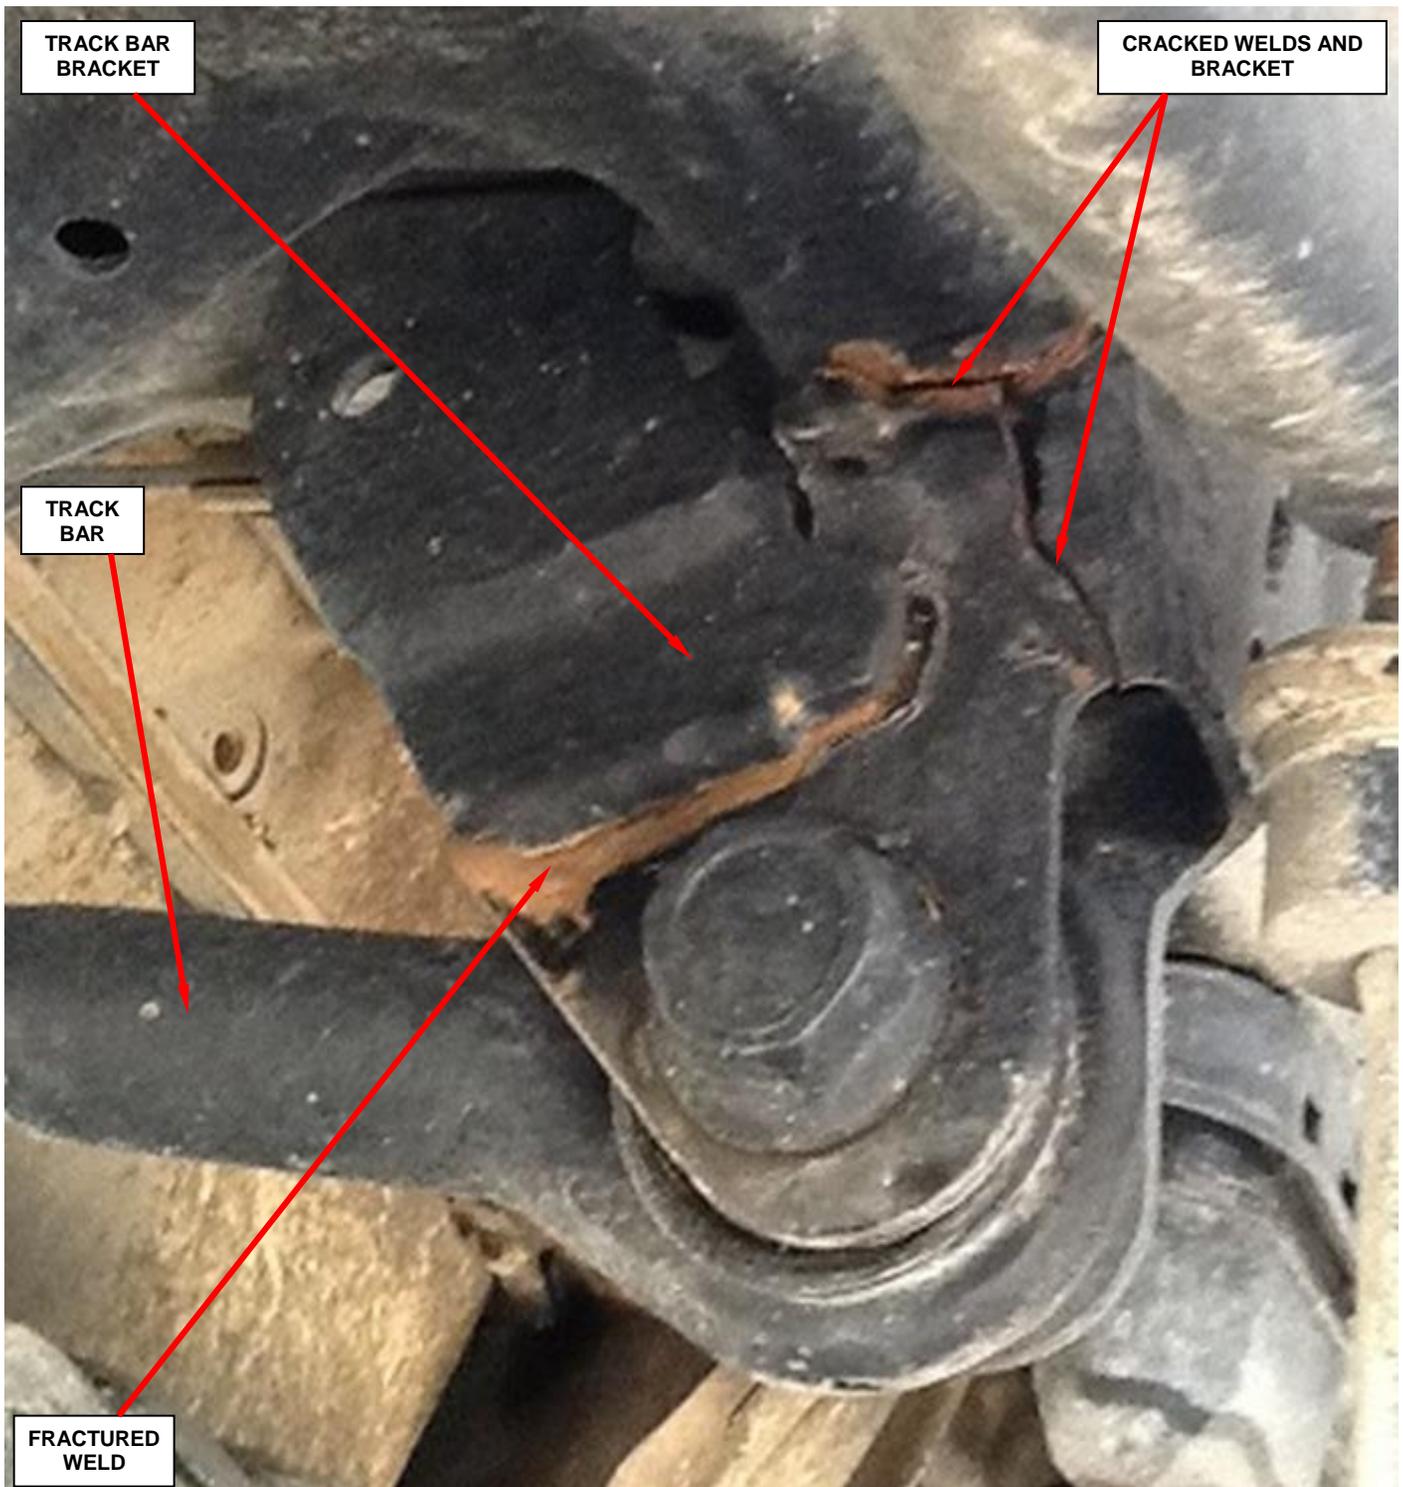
Example of a Fractured Weld at Track Bar Bracket
